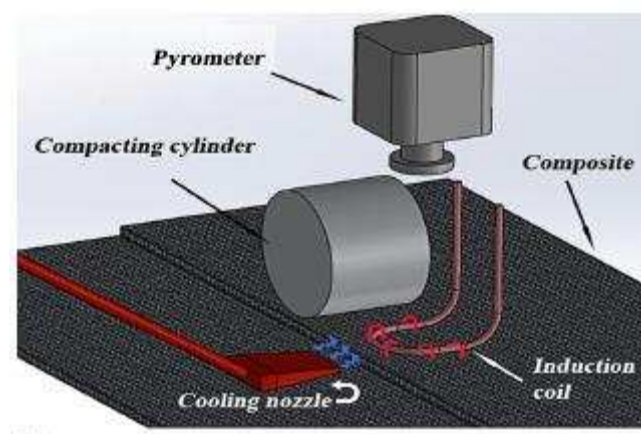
The conceptual outline of induction welding of carbon fiber thermoplastic composite [32]
